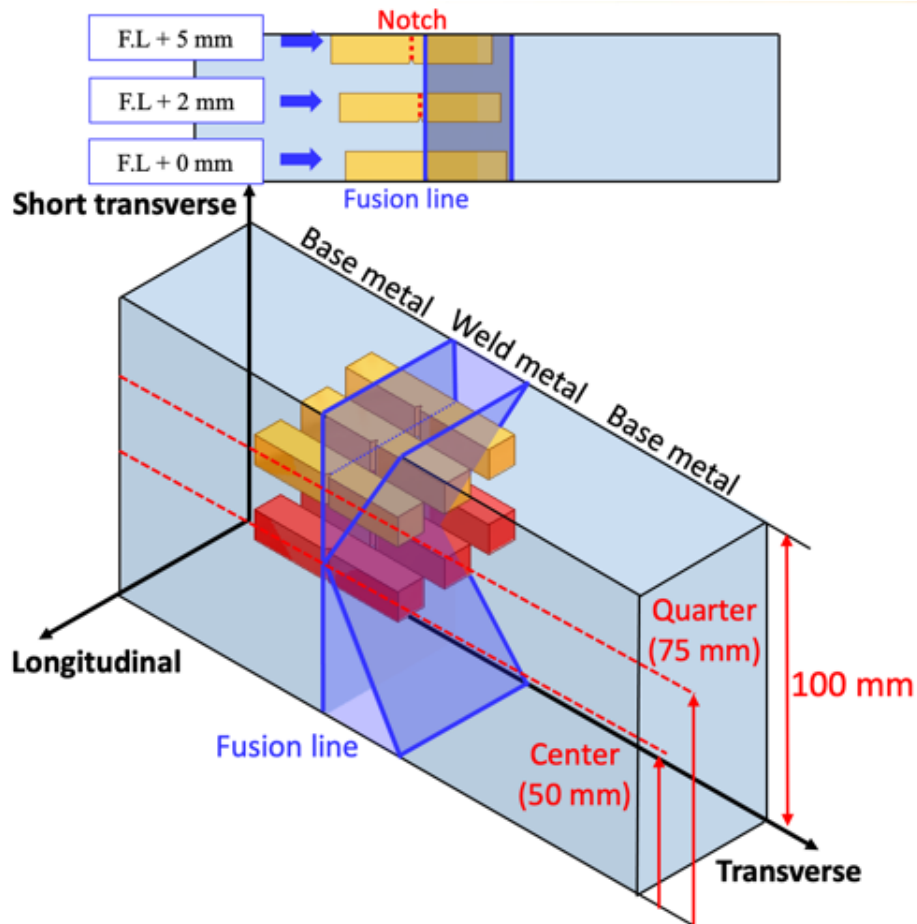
Schematic illustration of the FCAW welding specimen and Charpy V notch impact test specimens, which making notches from fusion line 0 mm, 2 mm, 5mm, respectively
